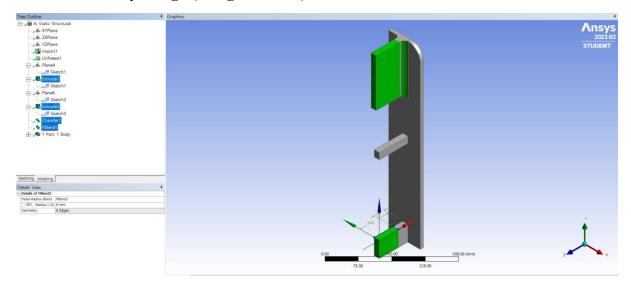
Making Imprinted Design, Chamfer and Blend in Geometry (Design Modeler)
